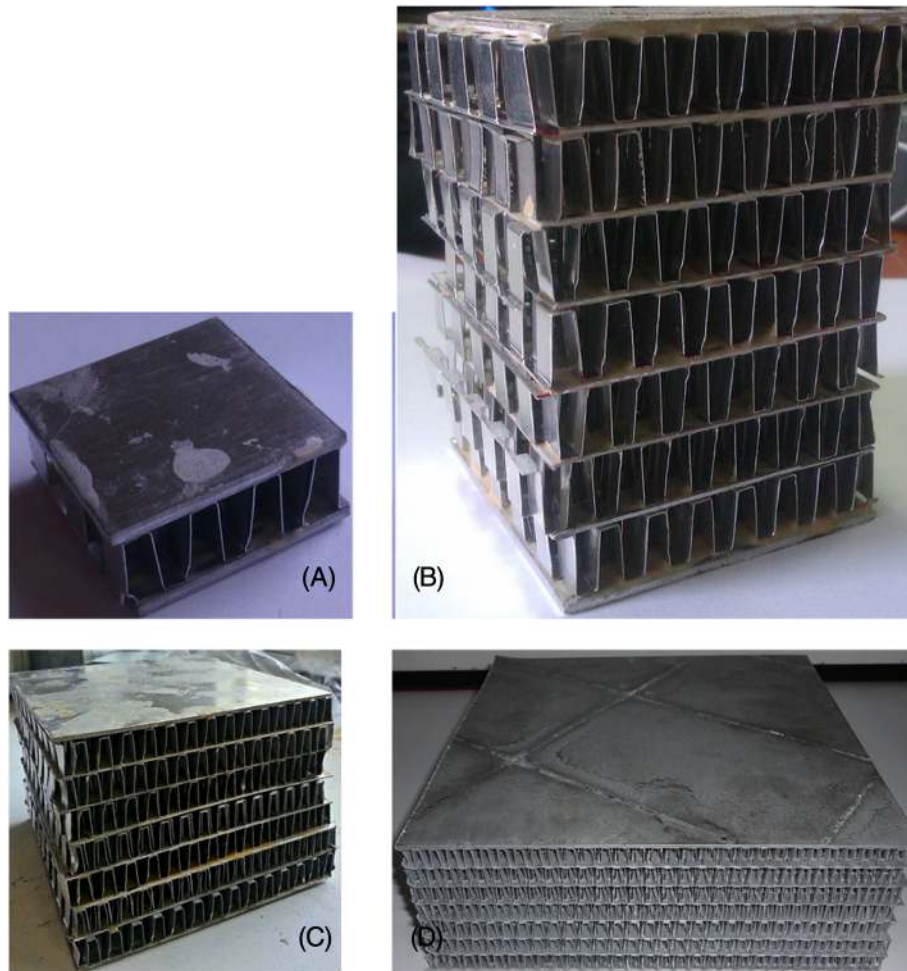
The pictures of (A) single-layer sandwich specimen ($25 \times 25 \times 12$ mm) and multi-layer sandwich specimens having the dimensions of (B) $50 \times 50 \times 70$ mm, (C) $100 \times 100 \times 70$ mm and (D) $200 \times 200 \times 70$ mm
